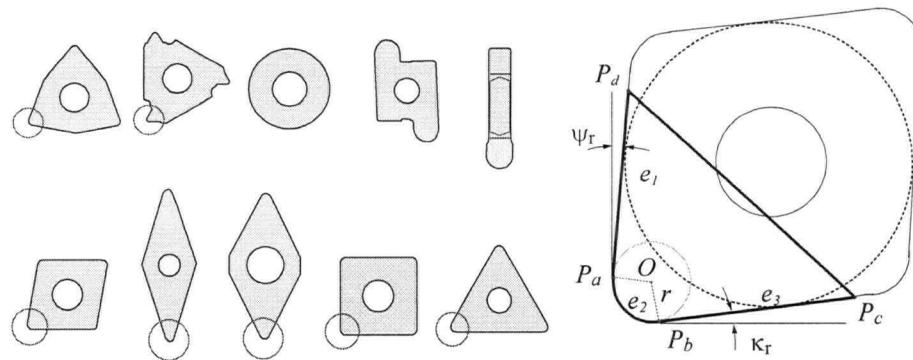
Typical Cutting Tool Inserts and Generic Cutting Edge Geometry
